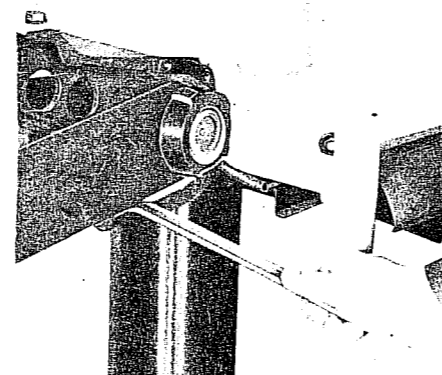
Levering the spring plate off the torsion bar. - Swing axle.
